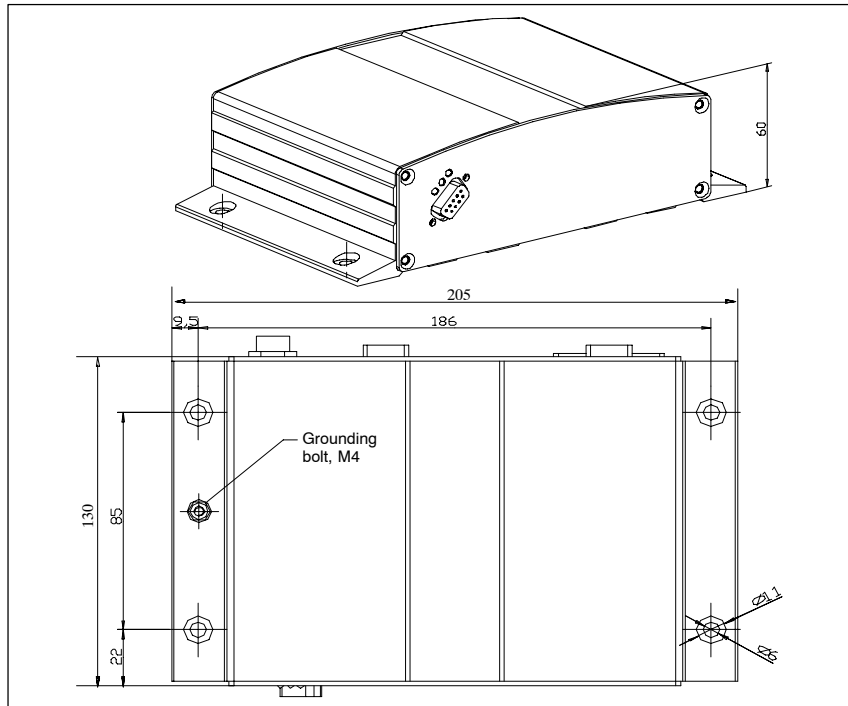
Drawing of ASM 824/850/854 with mounting holes
